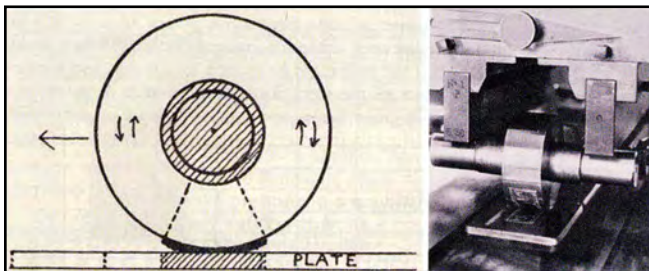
Transfer of stamp image from hardened steel roller-die onto printing plate.
